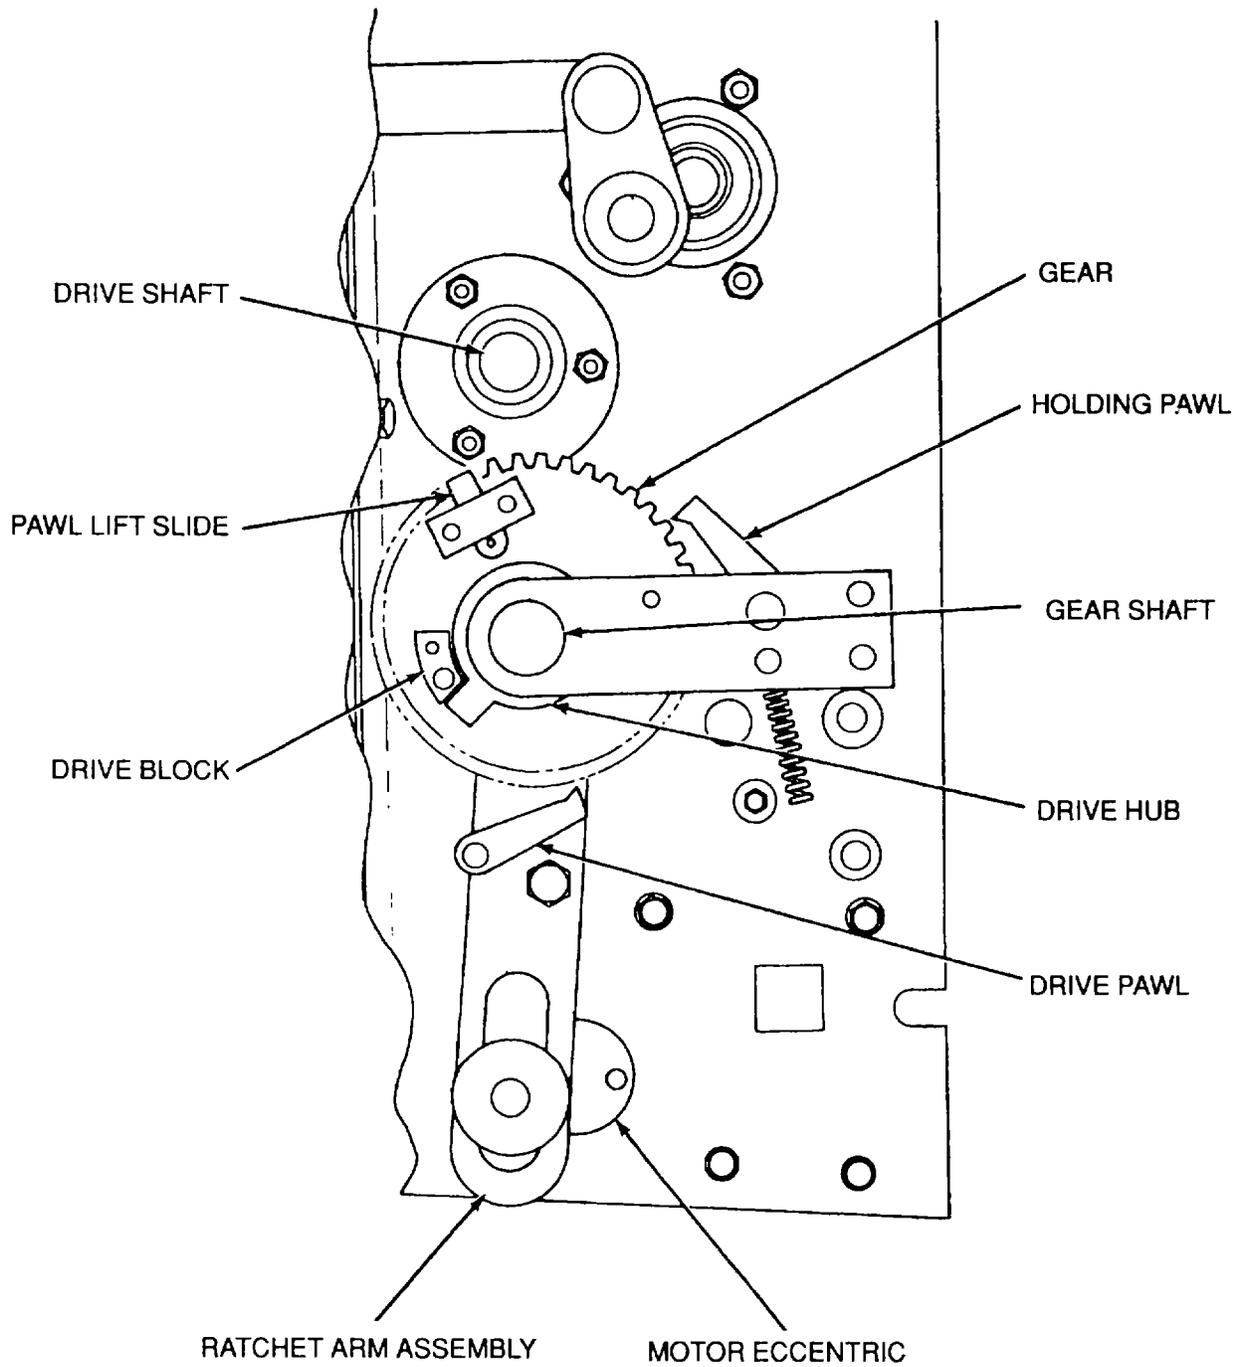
Load Circuit Breaker CB101, Detail of Drive Spring Charging Mechanism
